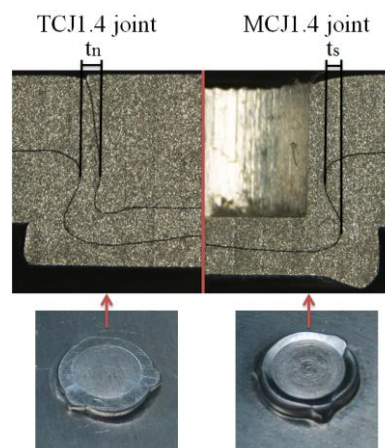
Appearances and cross-sectional shapes of the joints
